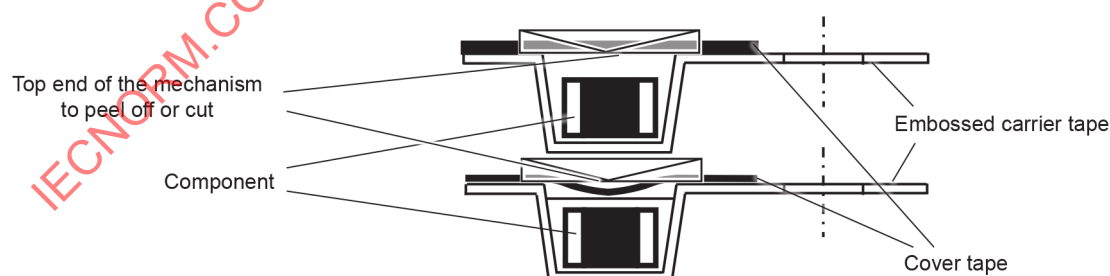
Example of a part of embossed carrier tape with a recessed part in a cross-bar section
